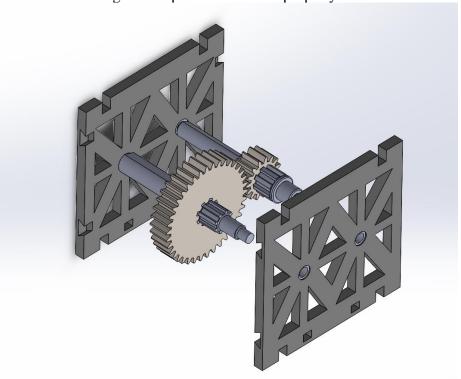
The Input and Output Shafts Being Put in Side Panel
